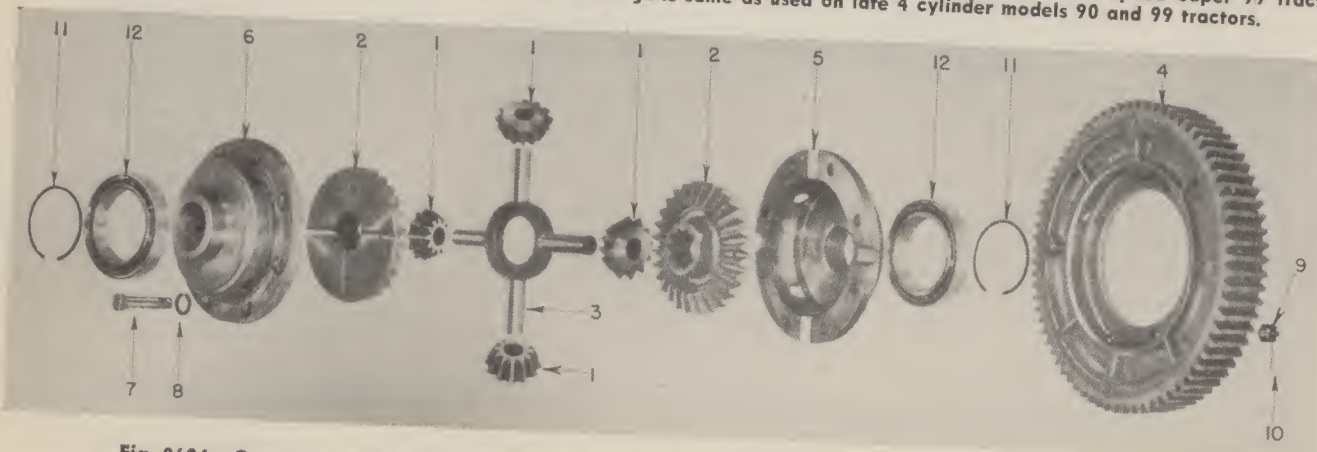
Components of differential and bull gear unit used on Super 97 tractors with 4 speed transmissions.
